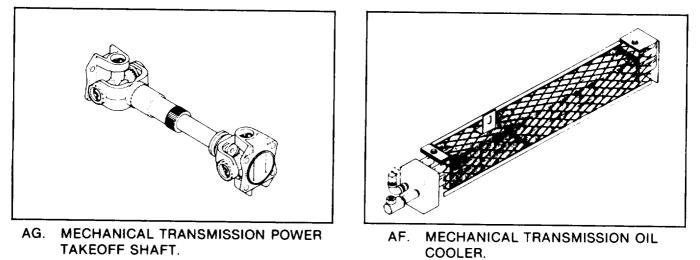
Location of major components, assemblies and auxiliaries (Sheet 7 of 7).
